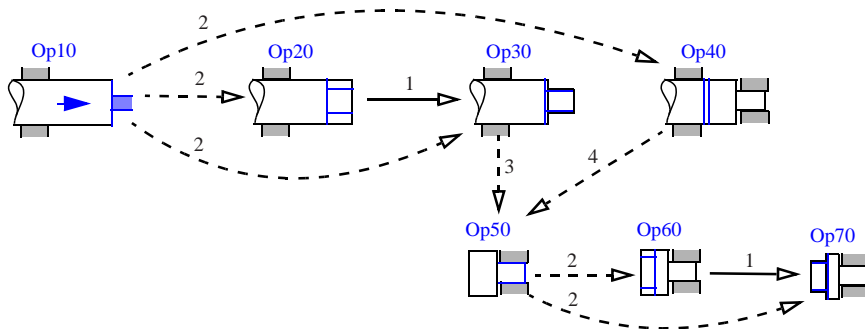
Manufacturing stages of the setting plan and design and stock removal dimensions.
